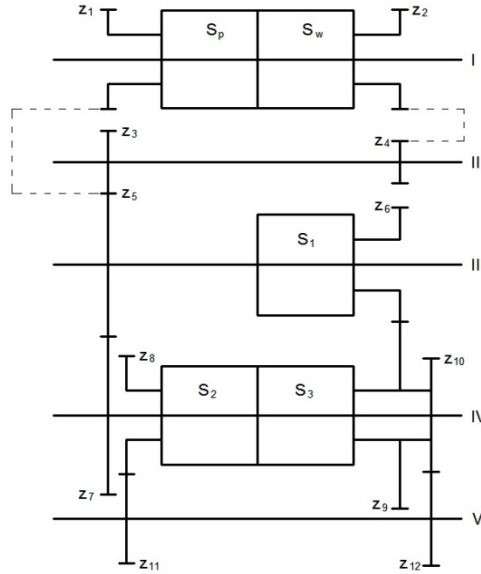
Kinematic scheme of a gearing in axial alignment: $z_1 - z_{12}$ – toothed gears, S_p, S_w, S_1, S_2, S_3 – clutches, I – V – shafts
